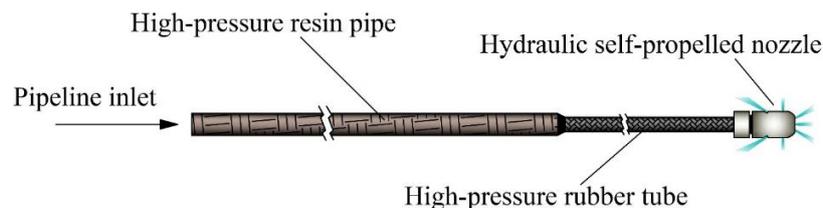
Device connection schematic for high-pressure resin pipe, high-pressure rubber tube, and hydraulic self-propelled nozzle.
